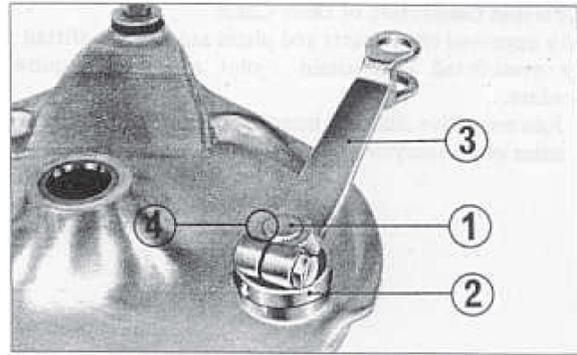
(1) Brake cam (2) Wear indicator (3) Brake arm (4) Punch mark
